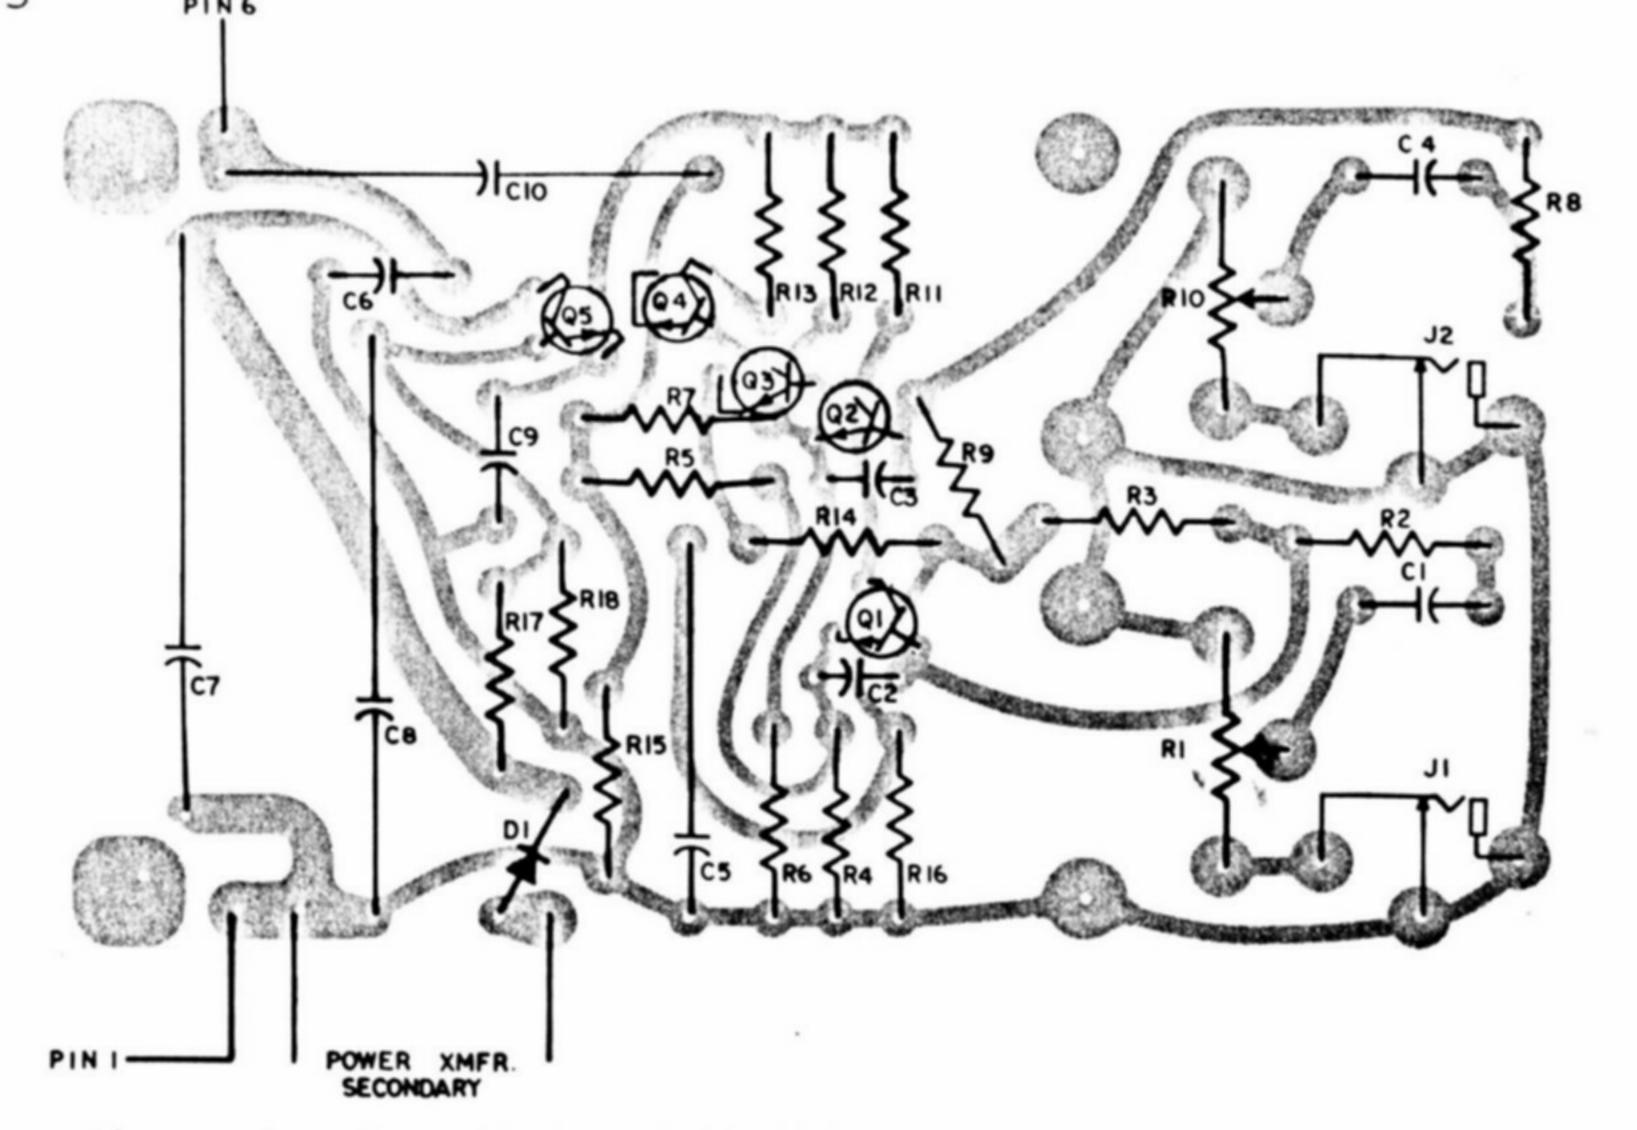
Circuit Board 020842 Layout (View From Foil Side)
